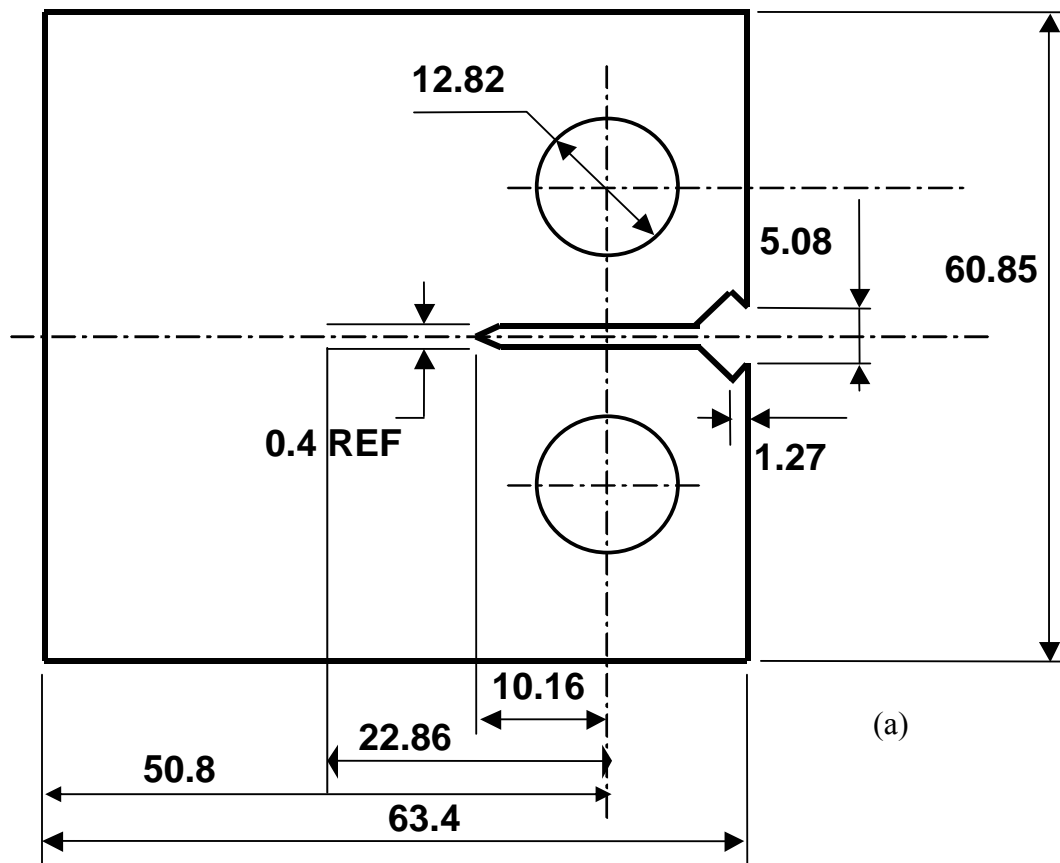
Compact-tension (CT) specimen (a) drawing and dimensions (units in mm). Thickness = 6.4 mm,
